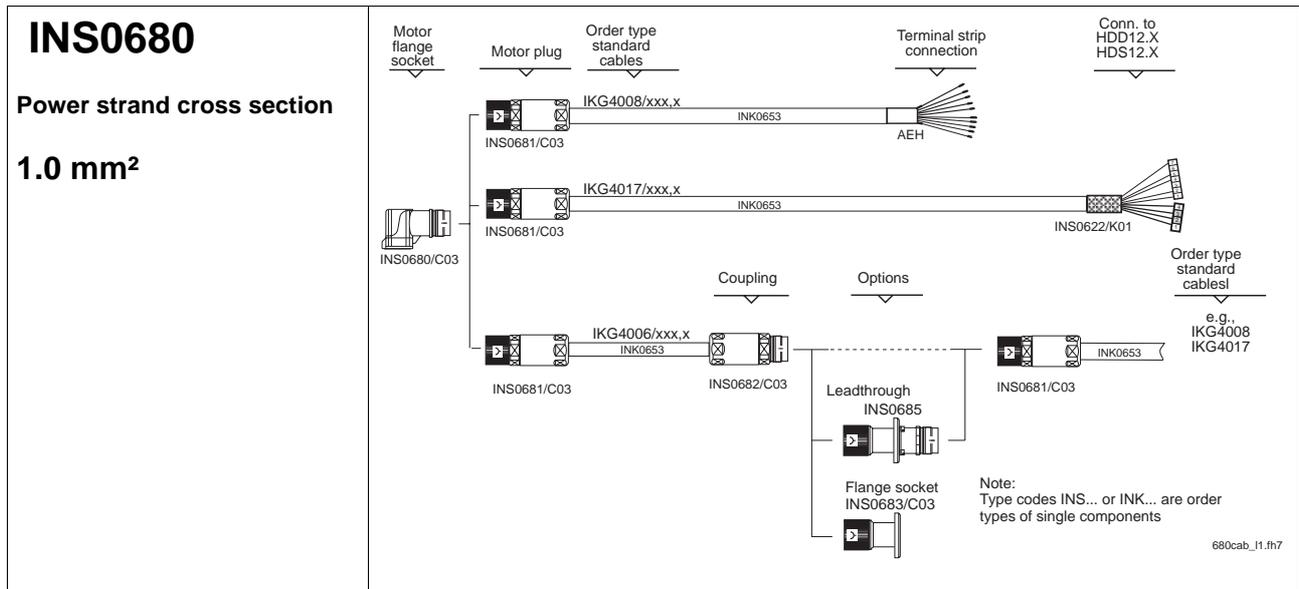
Motor power cable 1.0 mm<sup>2</sup> of flange socket INS0680
